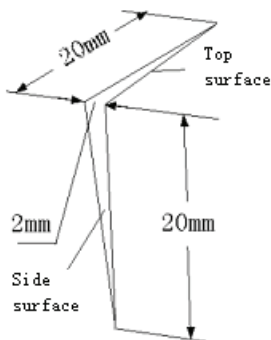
Dimensions of one kinds of crack with “V”-shape
